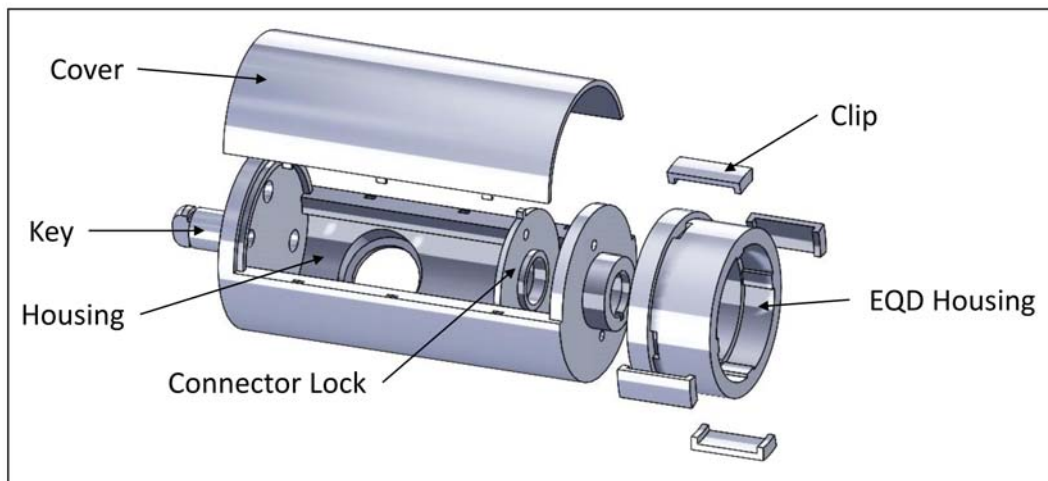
Exploded SolidWorks model of the myoelectric hand adapter, consisting of 5 different 3-D printed components: the *housing*, *cover*, *connector lock*, *clip* and *EQD housing*.
